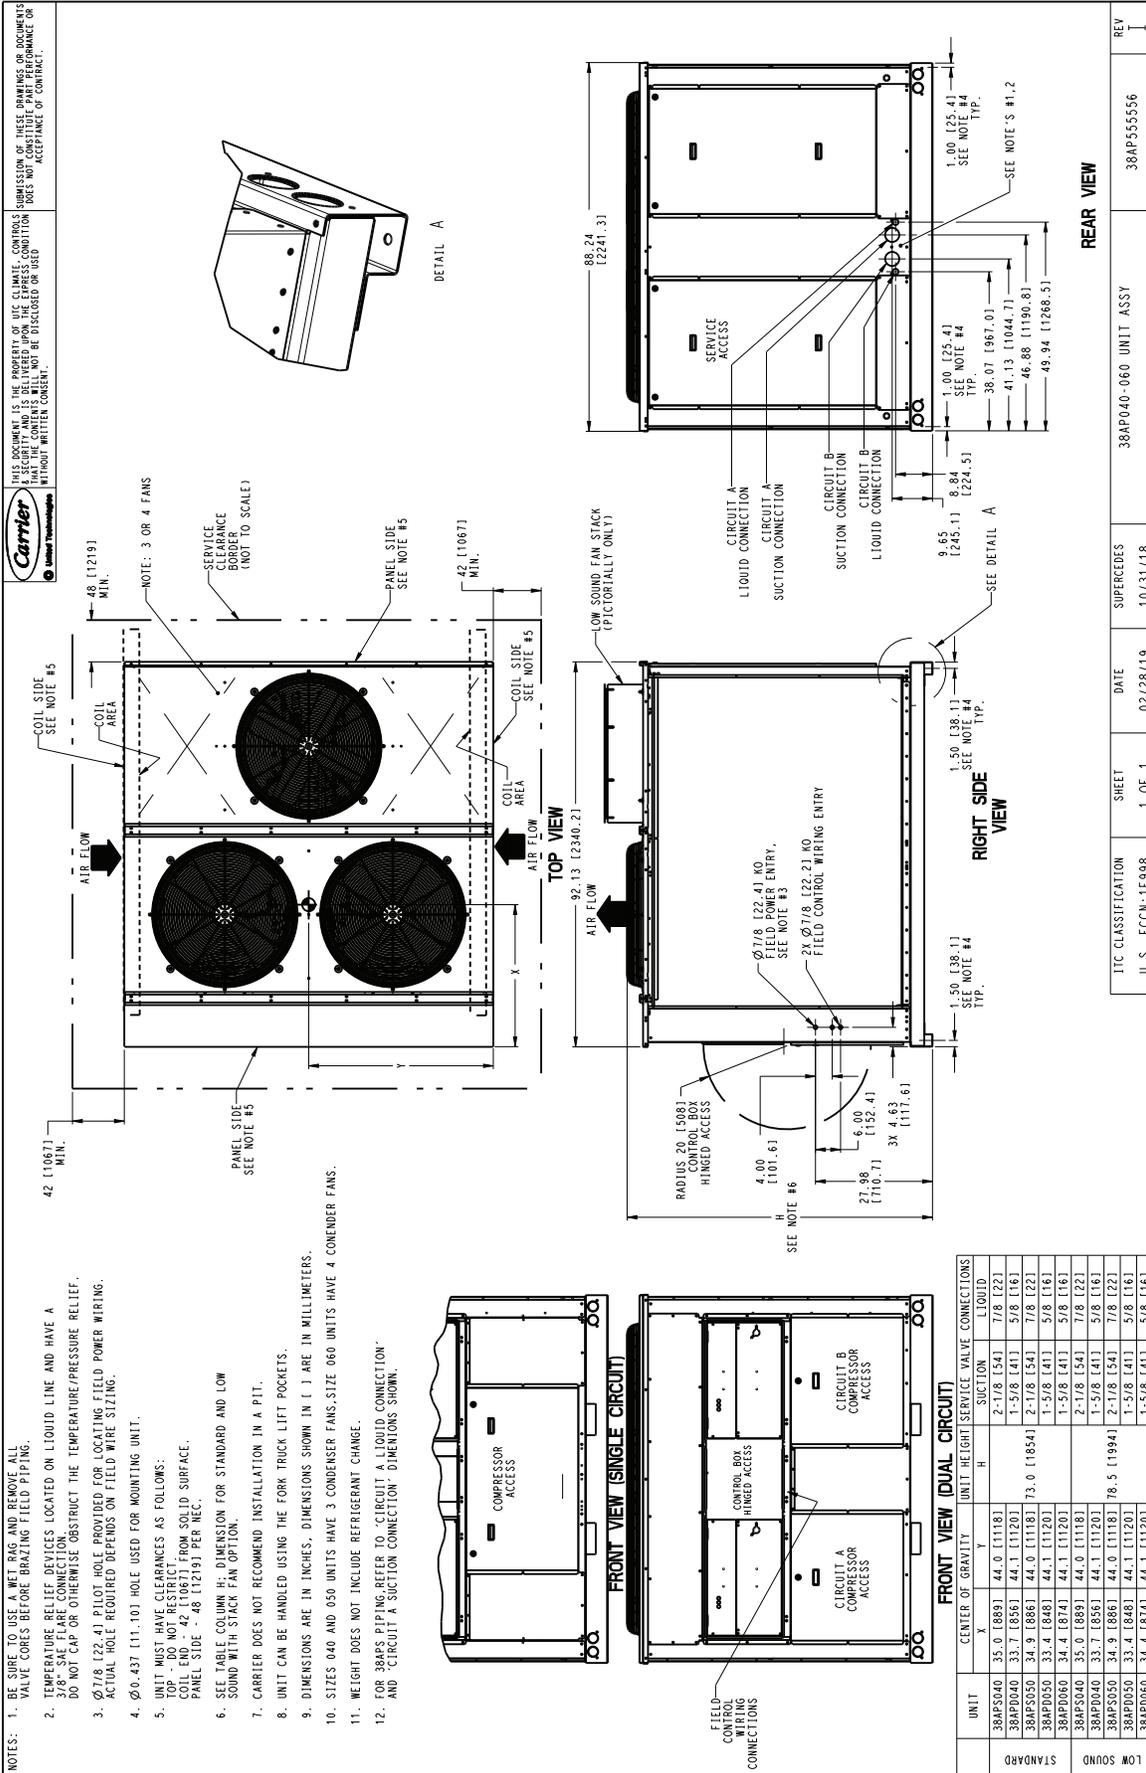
38AP Unit Dimensions, Sizes 040-060
